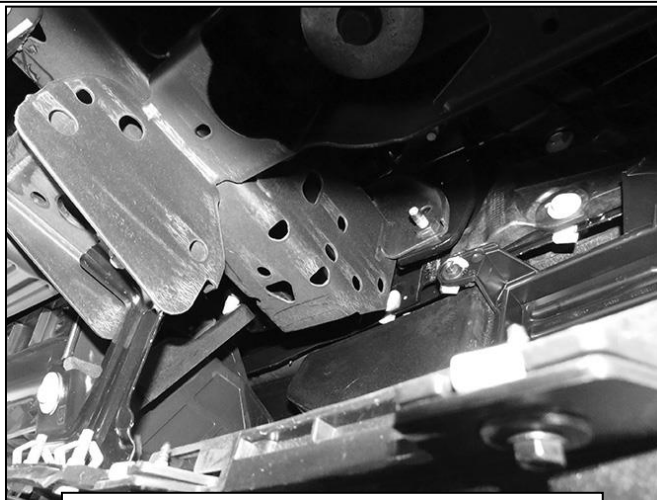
Tow hook removed. Opening may need to be trimmed to clear the Mounting Bracket assembly
